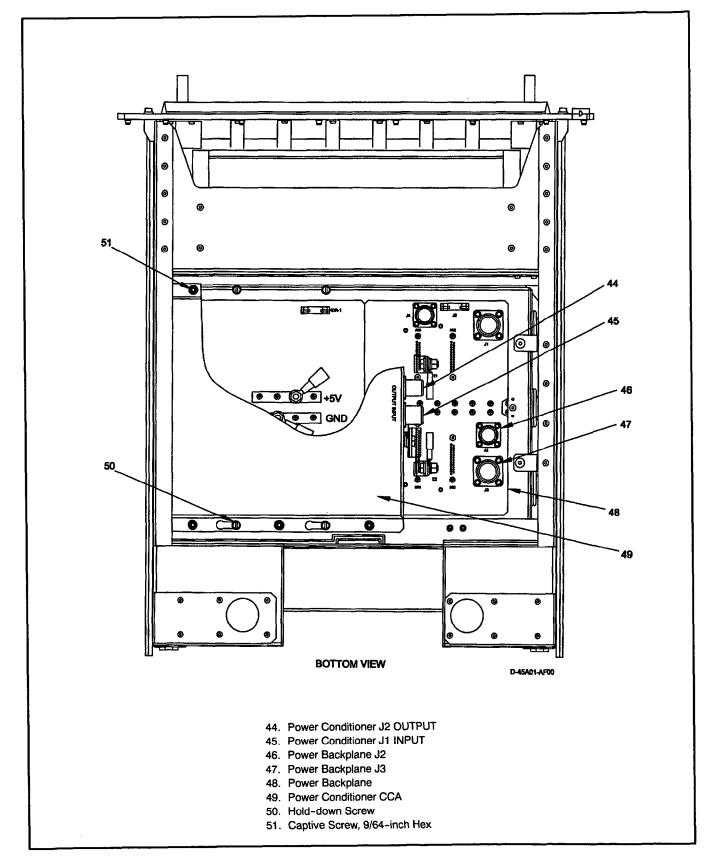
Processor-Display Assembly CP-2371/ASQ-225 and Components (Sheet 5)
